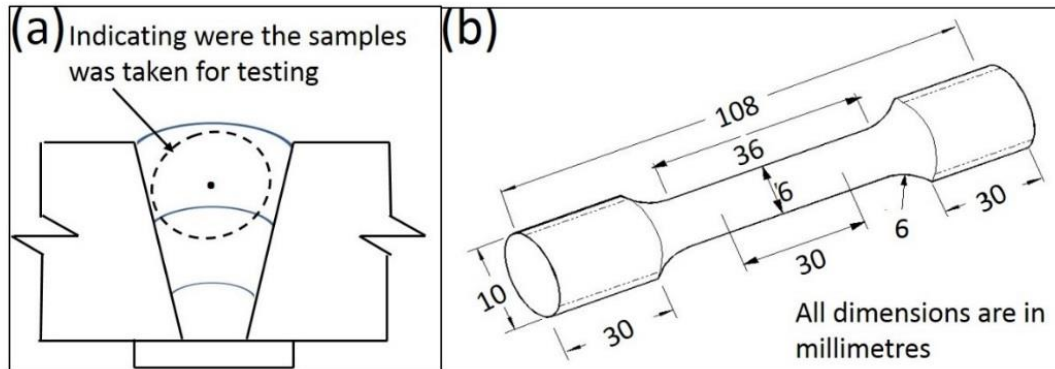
Tensile test (a) All weld metal in longitudinal direction (b) dimension of tested sample
